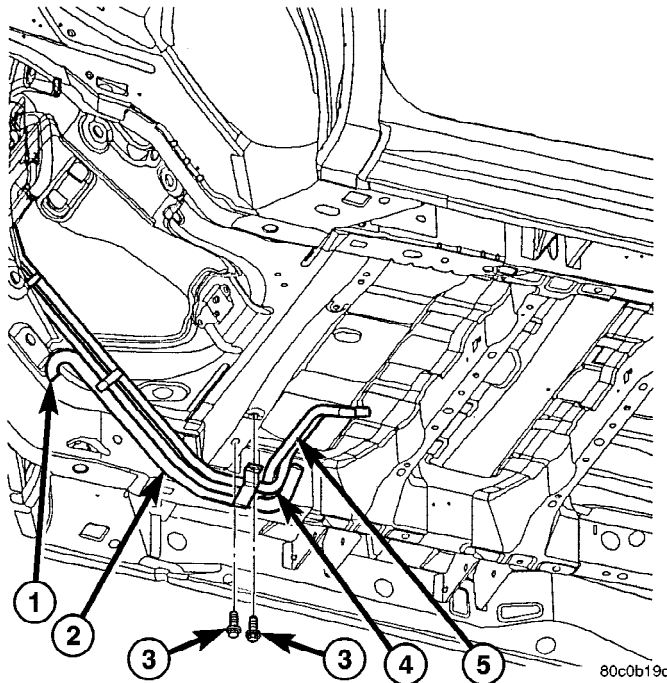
Cabin Heater Air Intake And Heater Pipe Assembly
